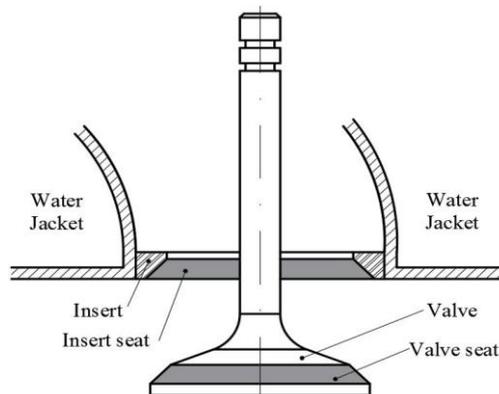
Schematic drawing indicating the valve and insert position in an internal combustion engine
